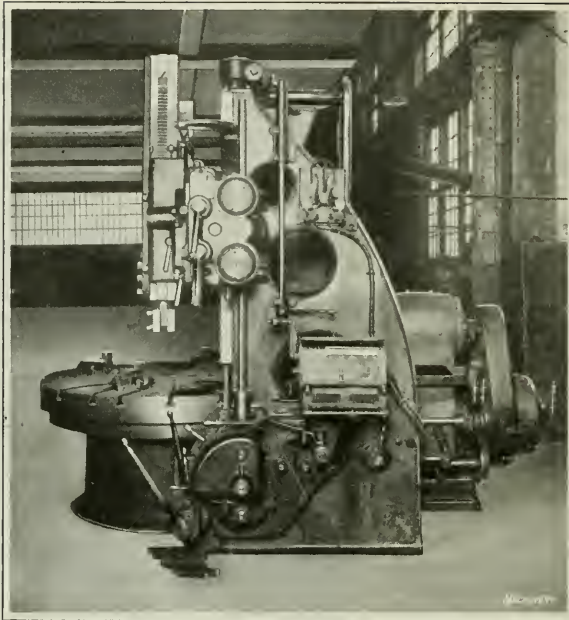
Boring Mill driven by a 15-horsepower Adjustable-speed Motor
